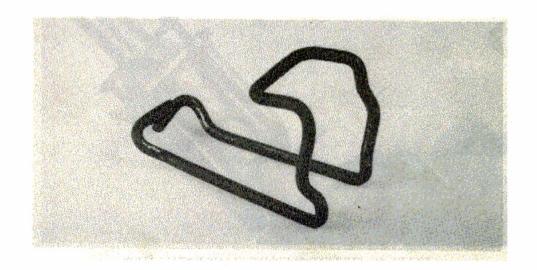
STEERING SHAFT COUPLING CLAMP
